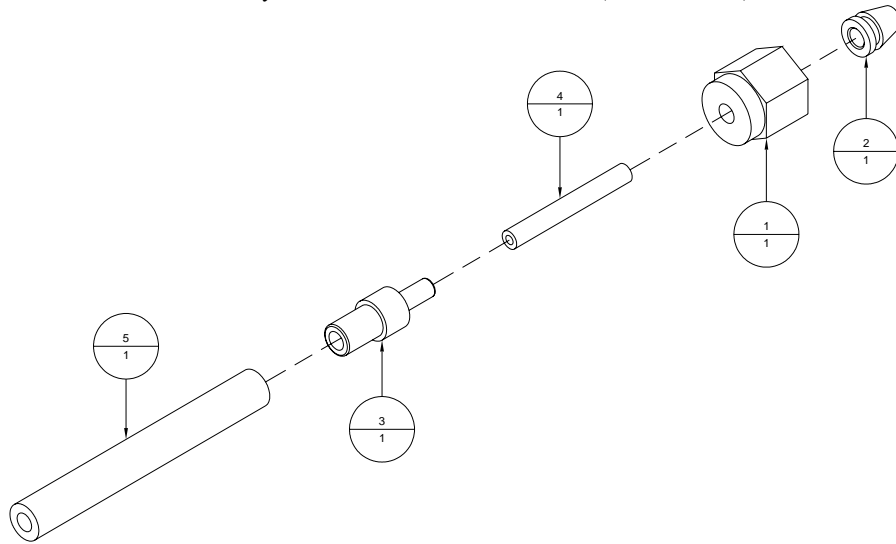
Ferrule Assembly, Atlas BK791 Printhead (9102350A)
